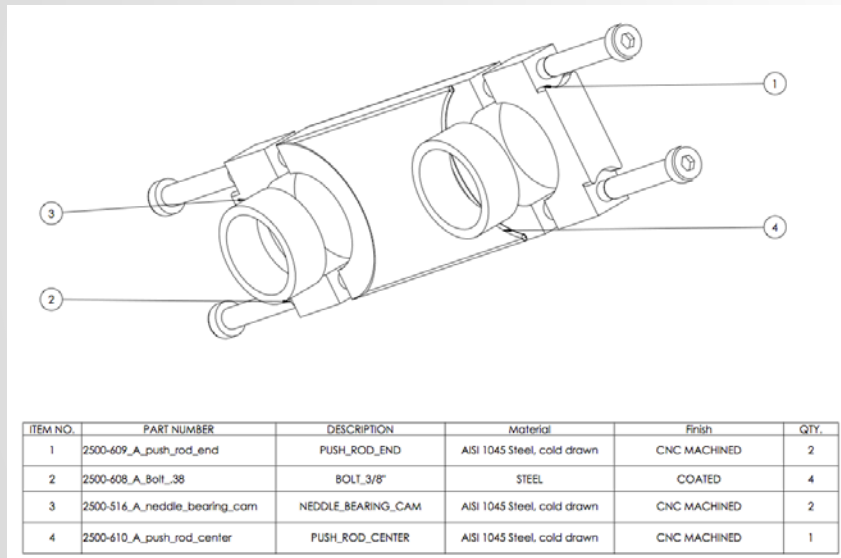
Detailed Drawing and Bill of Materials for Pushrod Subassembly
